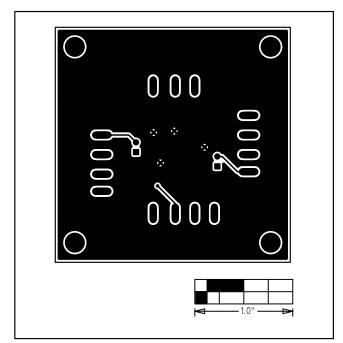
MAX4754A EV Kit PCB Layout—Solder Side
